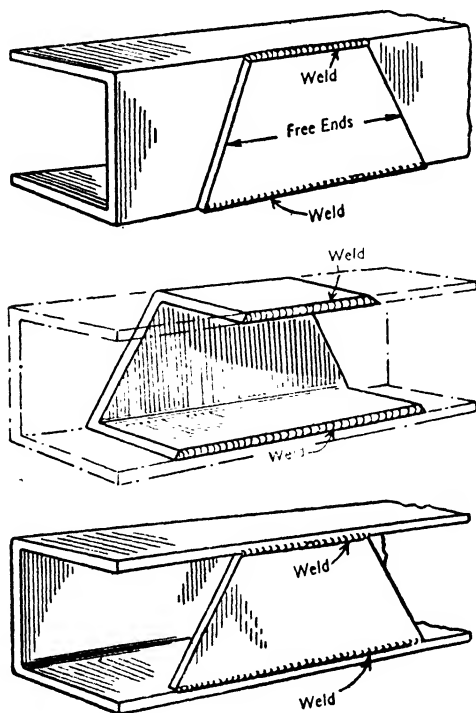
CORRECT METHODS OF WELDING CHASSIS FRAME REINFORCEMENTS
